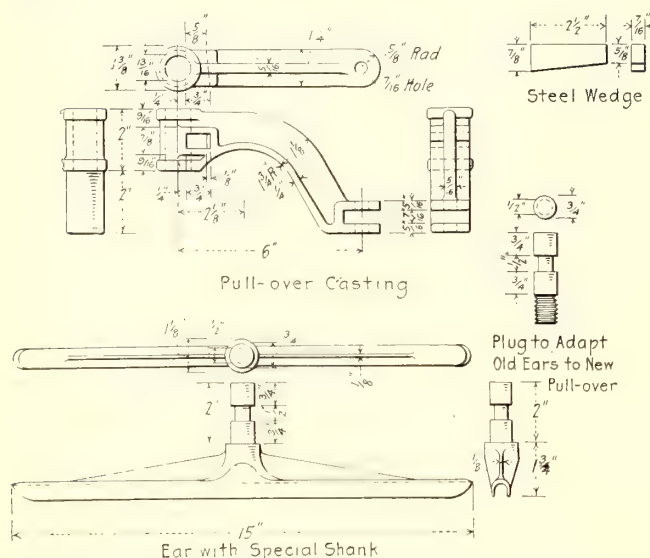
DETAILS OF THREADLESS PULL-OVER CASTING AND EAR WITH SPECIAL SHANK
